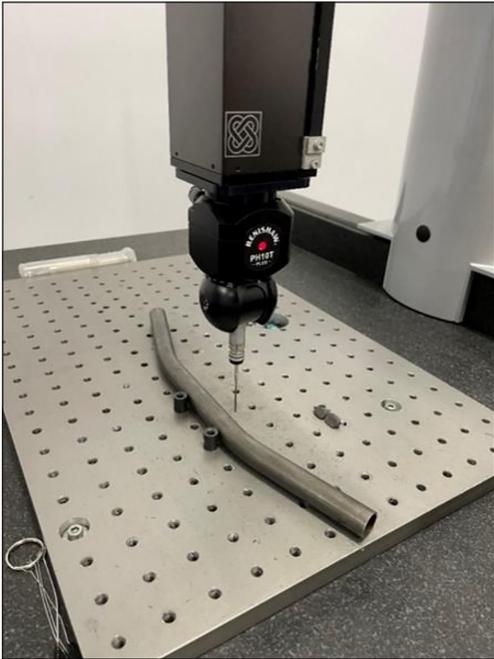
Measurement of pipe geometry on a CMM measuring machine
